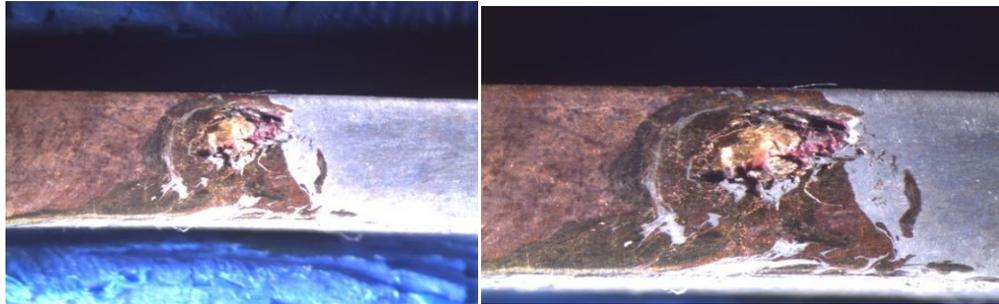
Friction stir welding when tool running at 500 rpm
